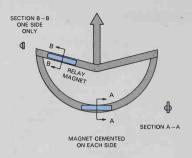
The experimental motor has an armature made of flat 18 gauge aluminum. Note placement of little magnets for core and triggering the reed relay. No dimensions are specified. Design it by using available materials.
